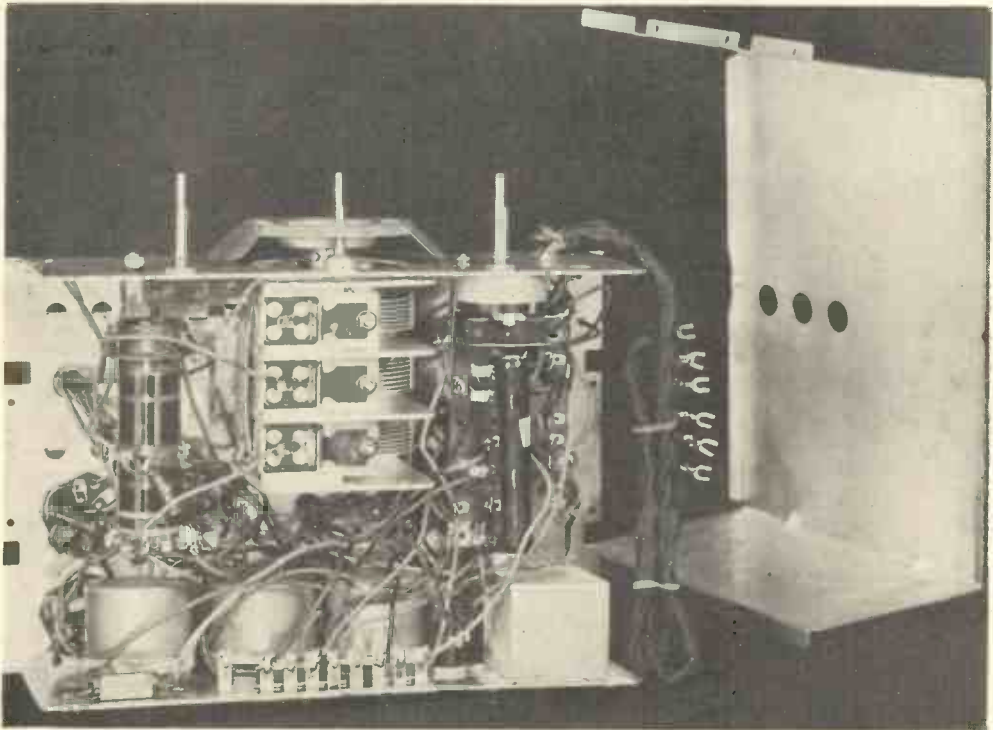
BOTTOM VIEW OF RCA VICTOR MODEL R.78 CHASSIS.
